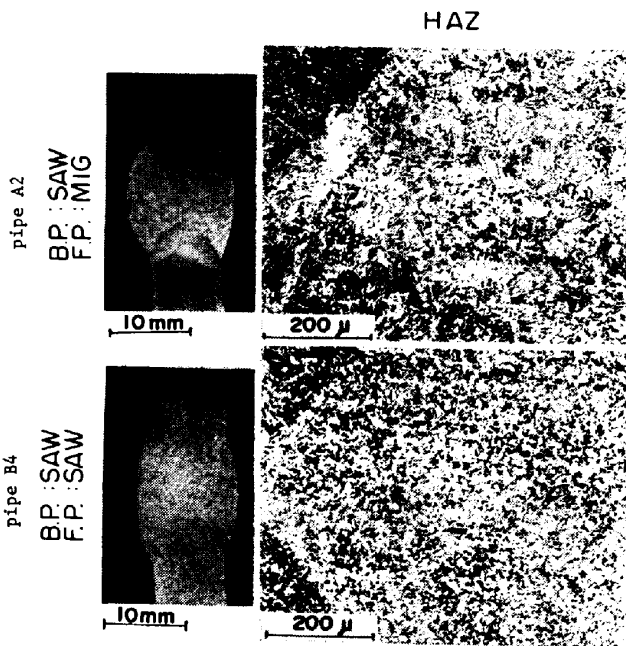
Macro and micro-structure of welded joint of pipe A2 and B4.
